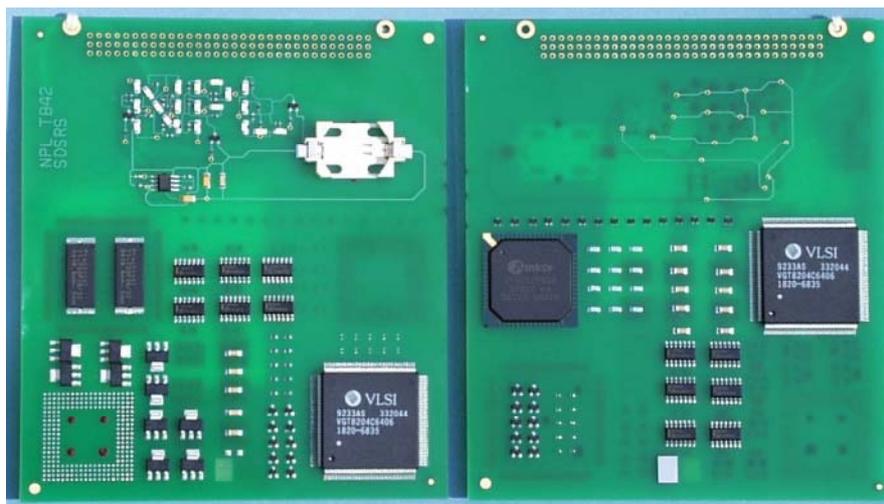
SDSRS Test Assembly (NPL Test Board TB42)
